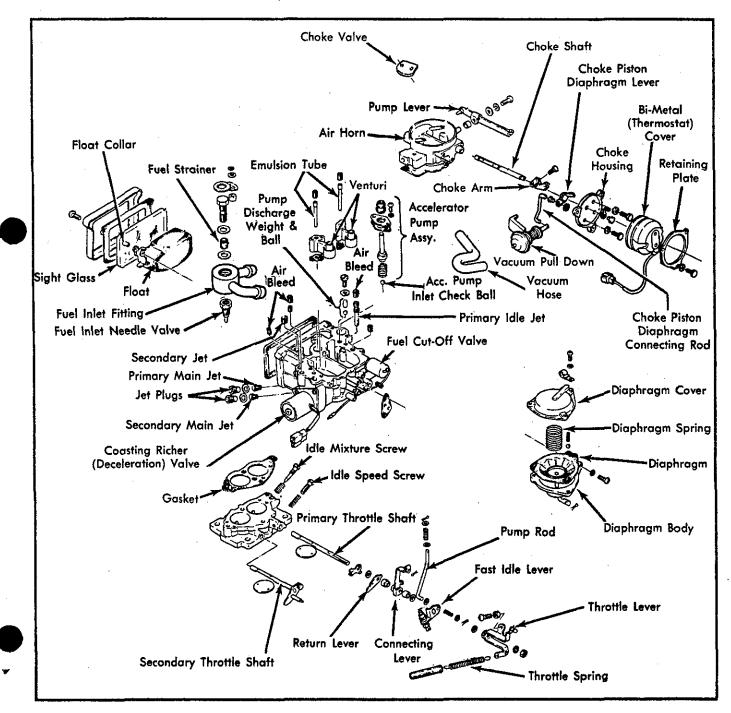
Exploded View of Hitachi DCS 328 2-Barrel Carburetor (Ford Courier 2300)
